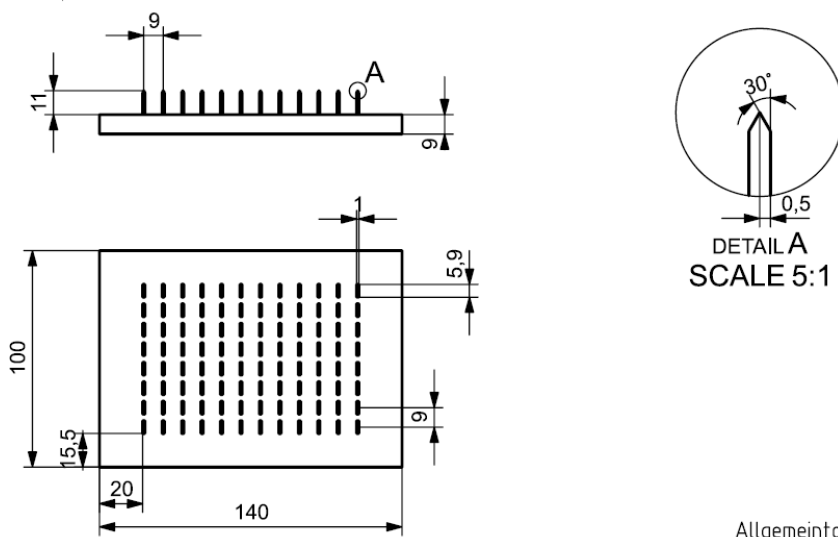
Technical drawing of the 96-well molding tool that was used as the blueprint for the recreation by metal 3d-printing.
